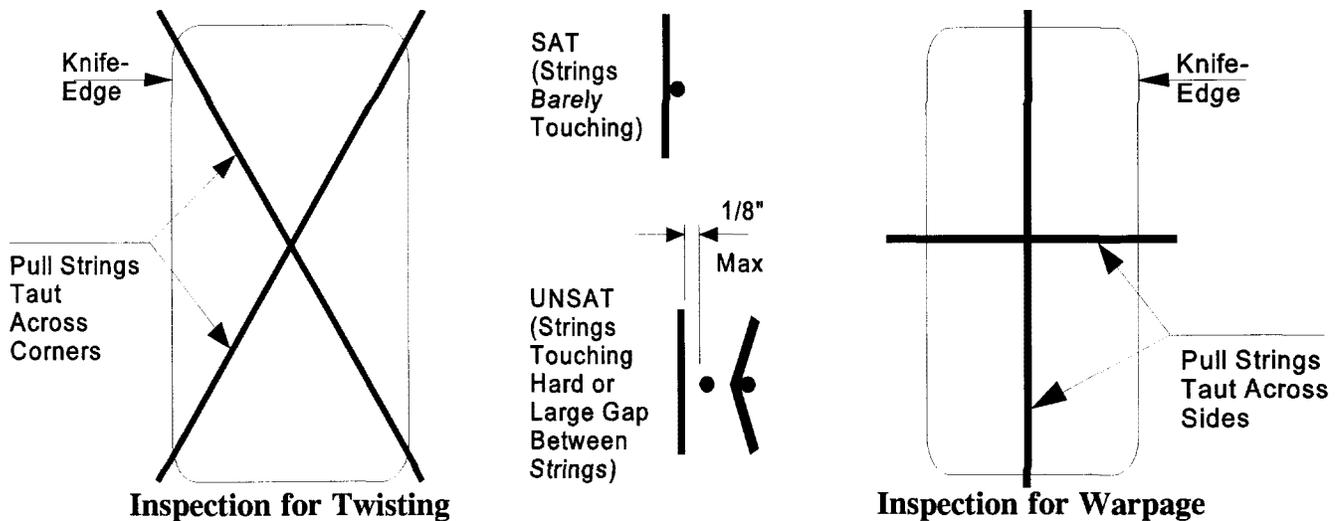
Knife-Edge Inspection for Warpage
